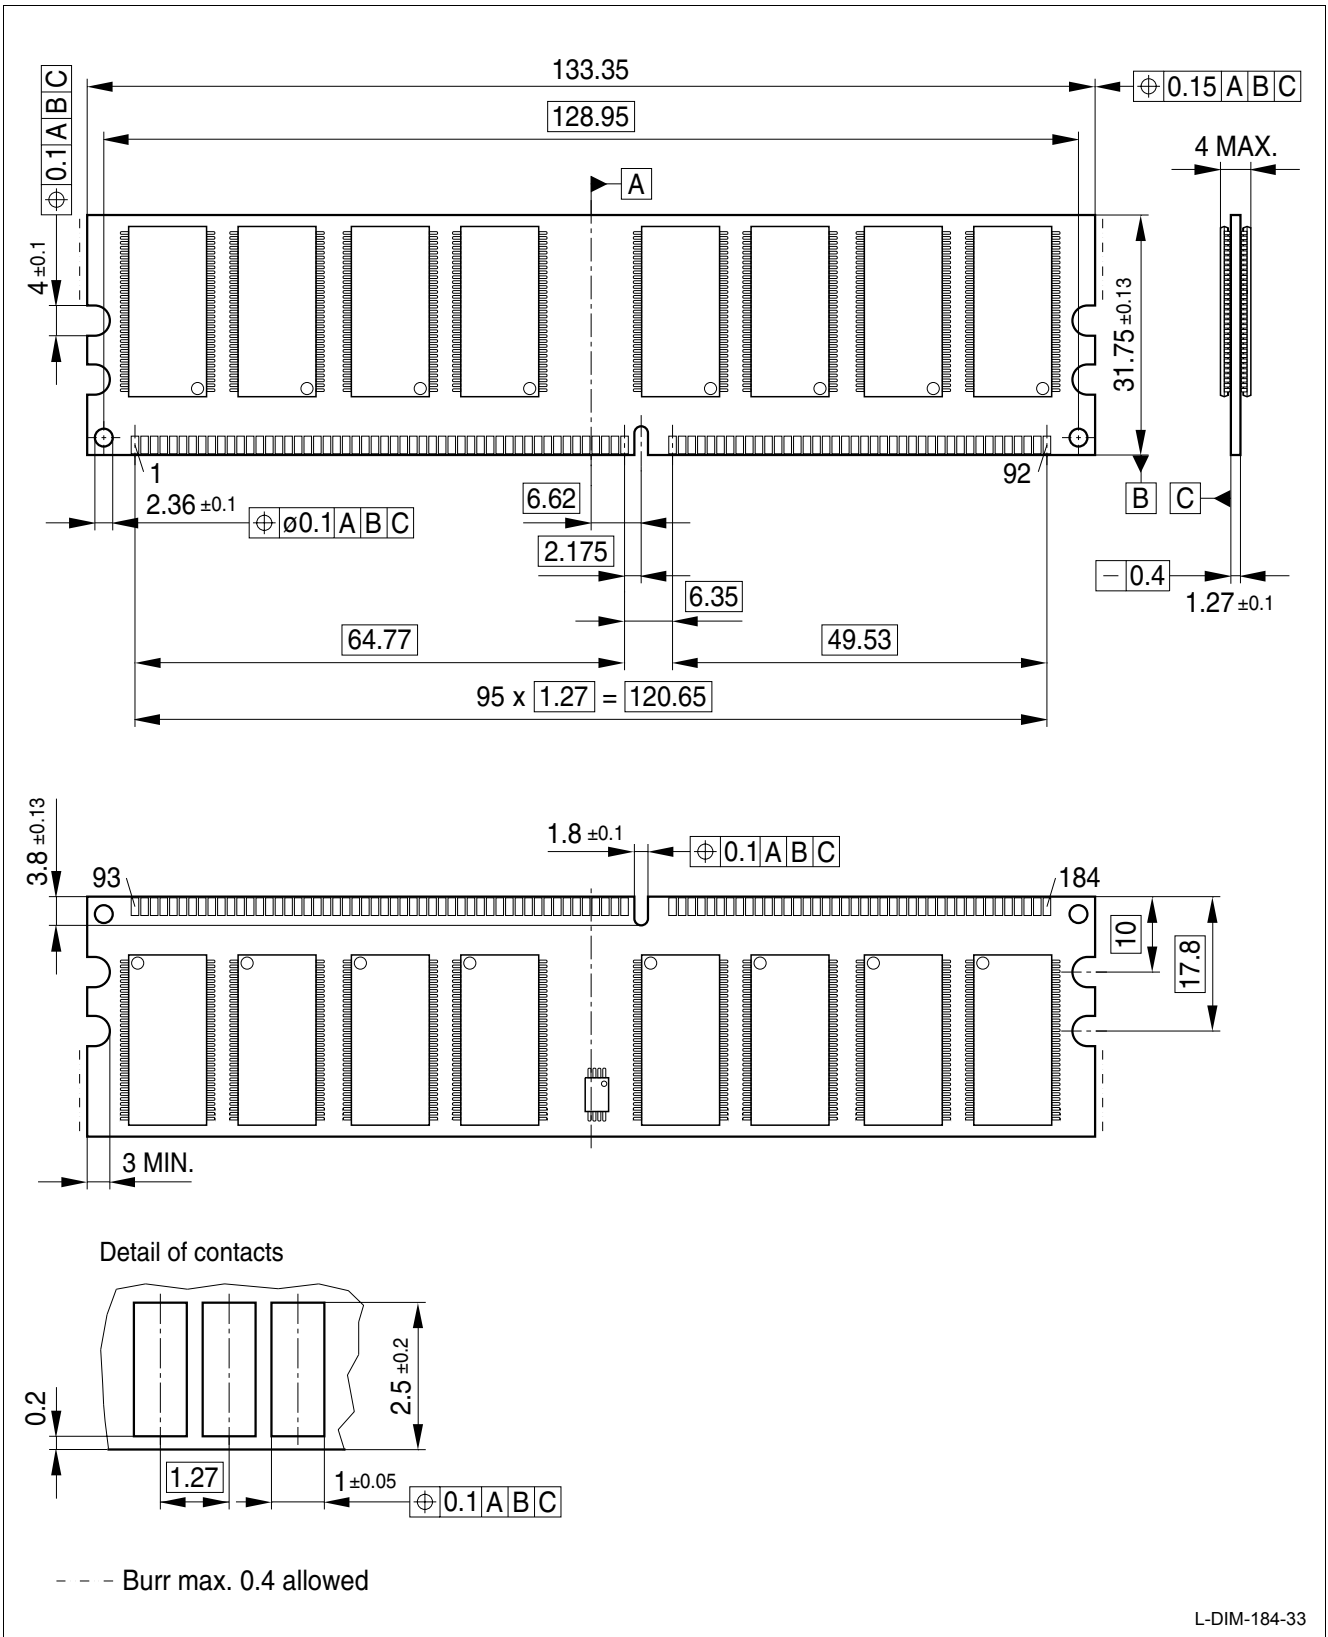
Package Outline - Raw Card A 256 MByte, 1 Rank ECC Module
